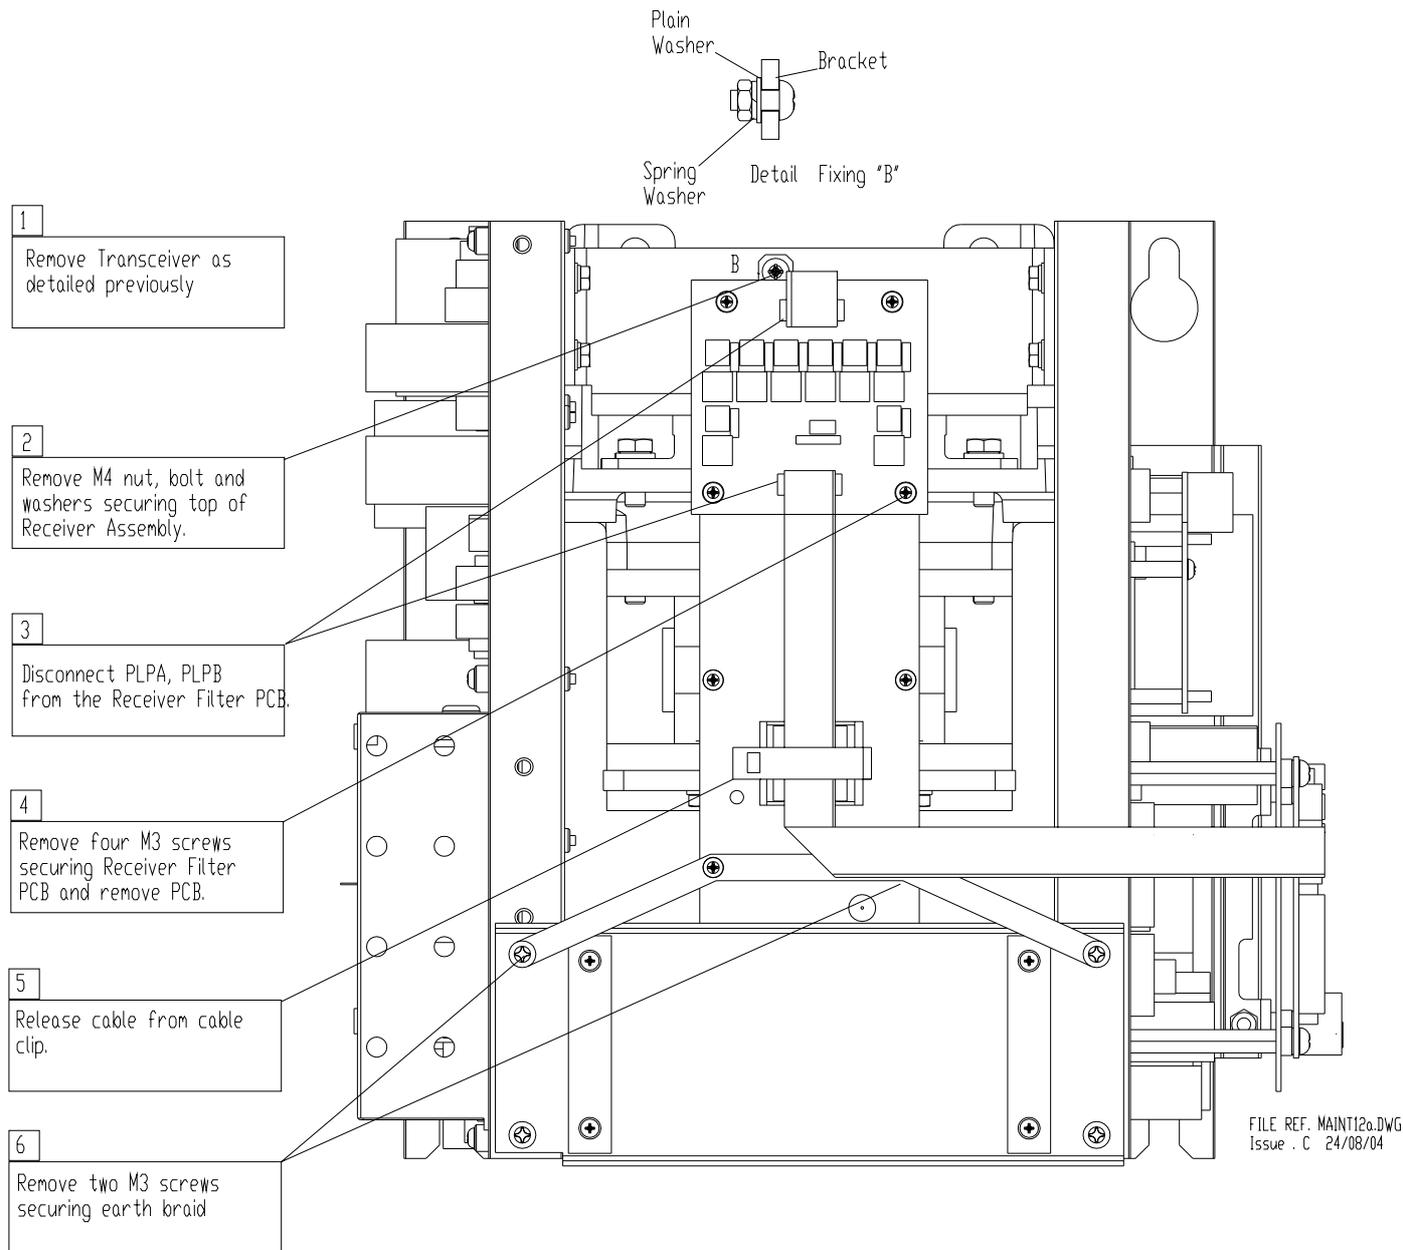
(Sheet 1 of 2) – Replacement of Receiver Assembly 65830616
